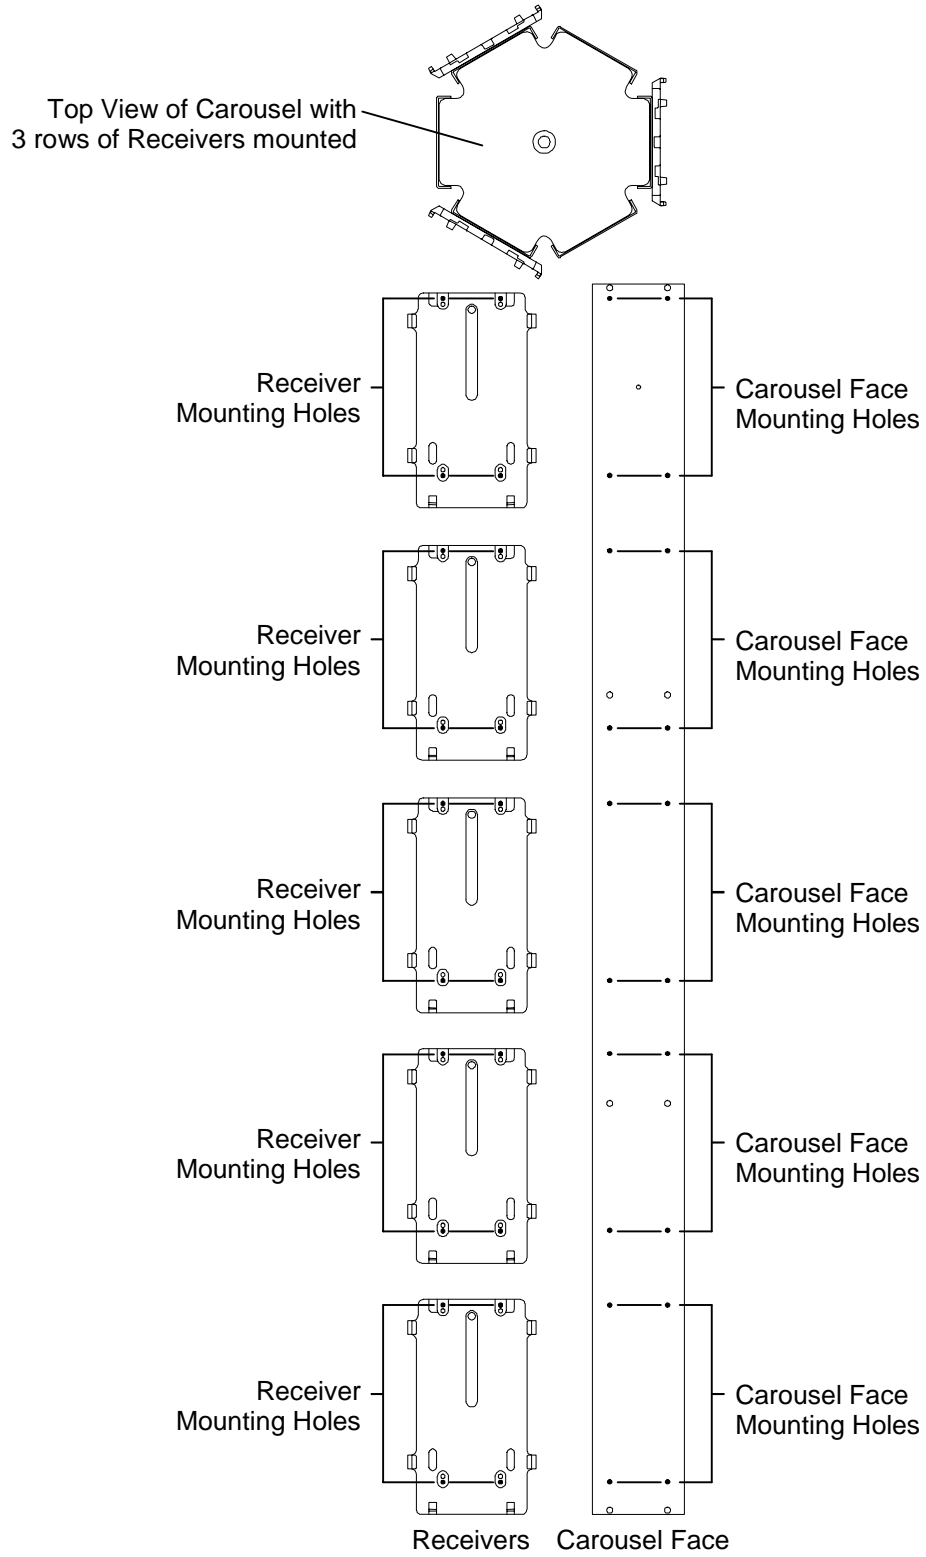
Hole Pattern for Mounting Receivers on Carousel
